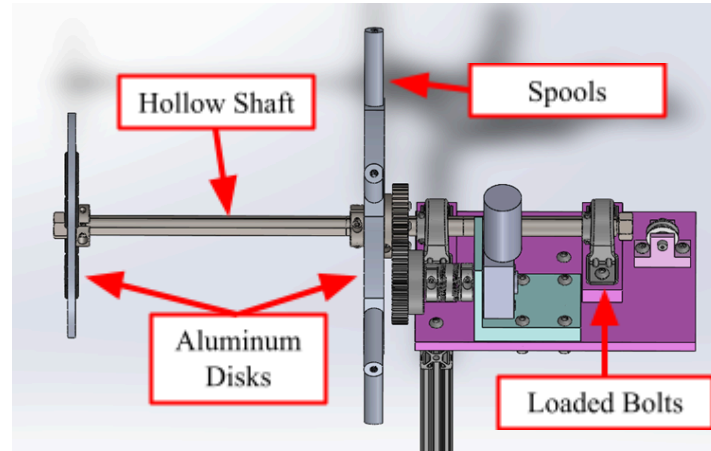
All parts associated with the loads and rotation of the hollow shaft
